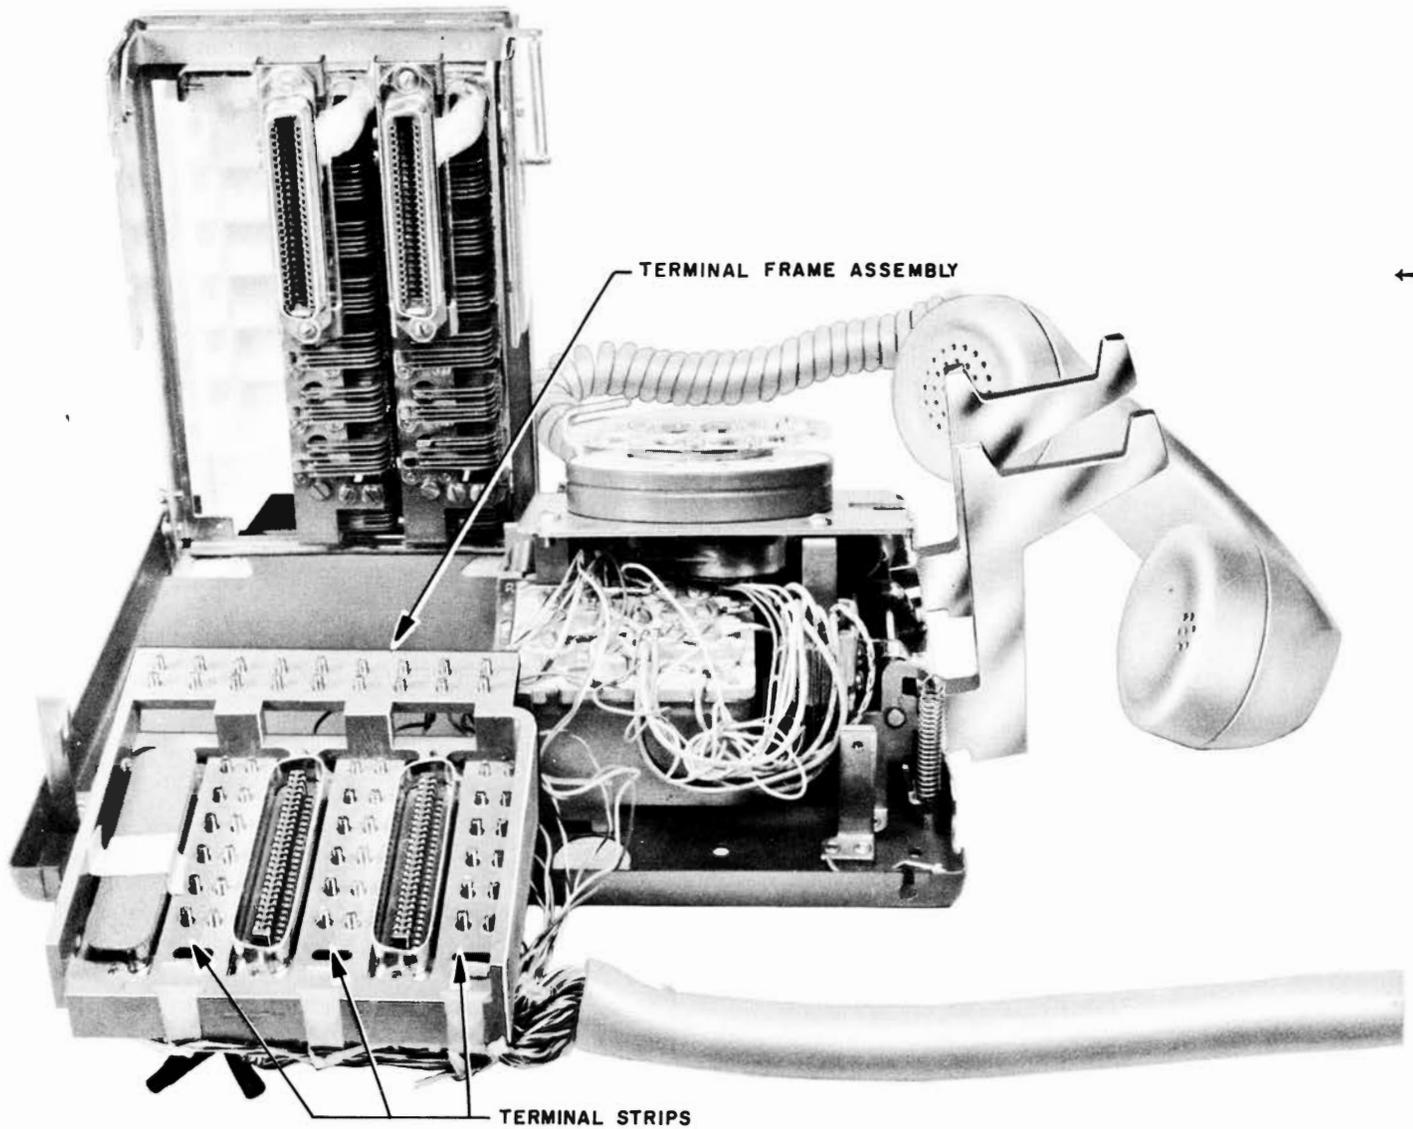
630-Type Telephone Set Showing Removal of Cord Frame
